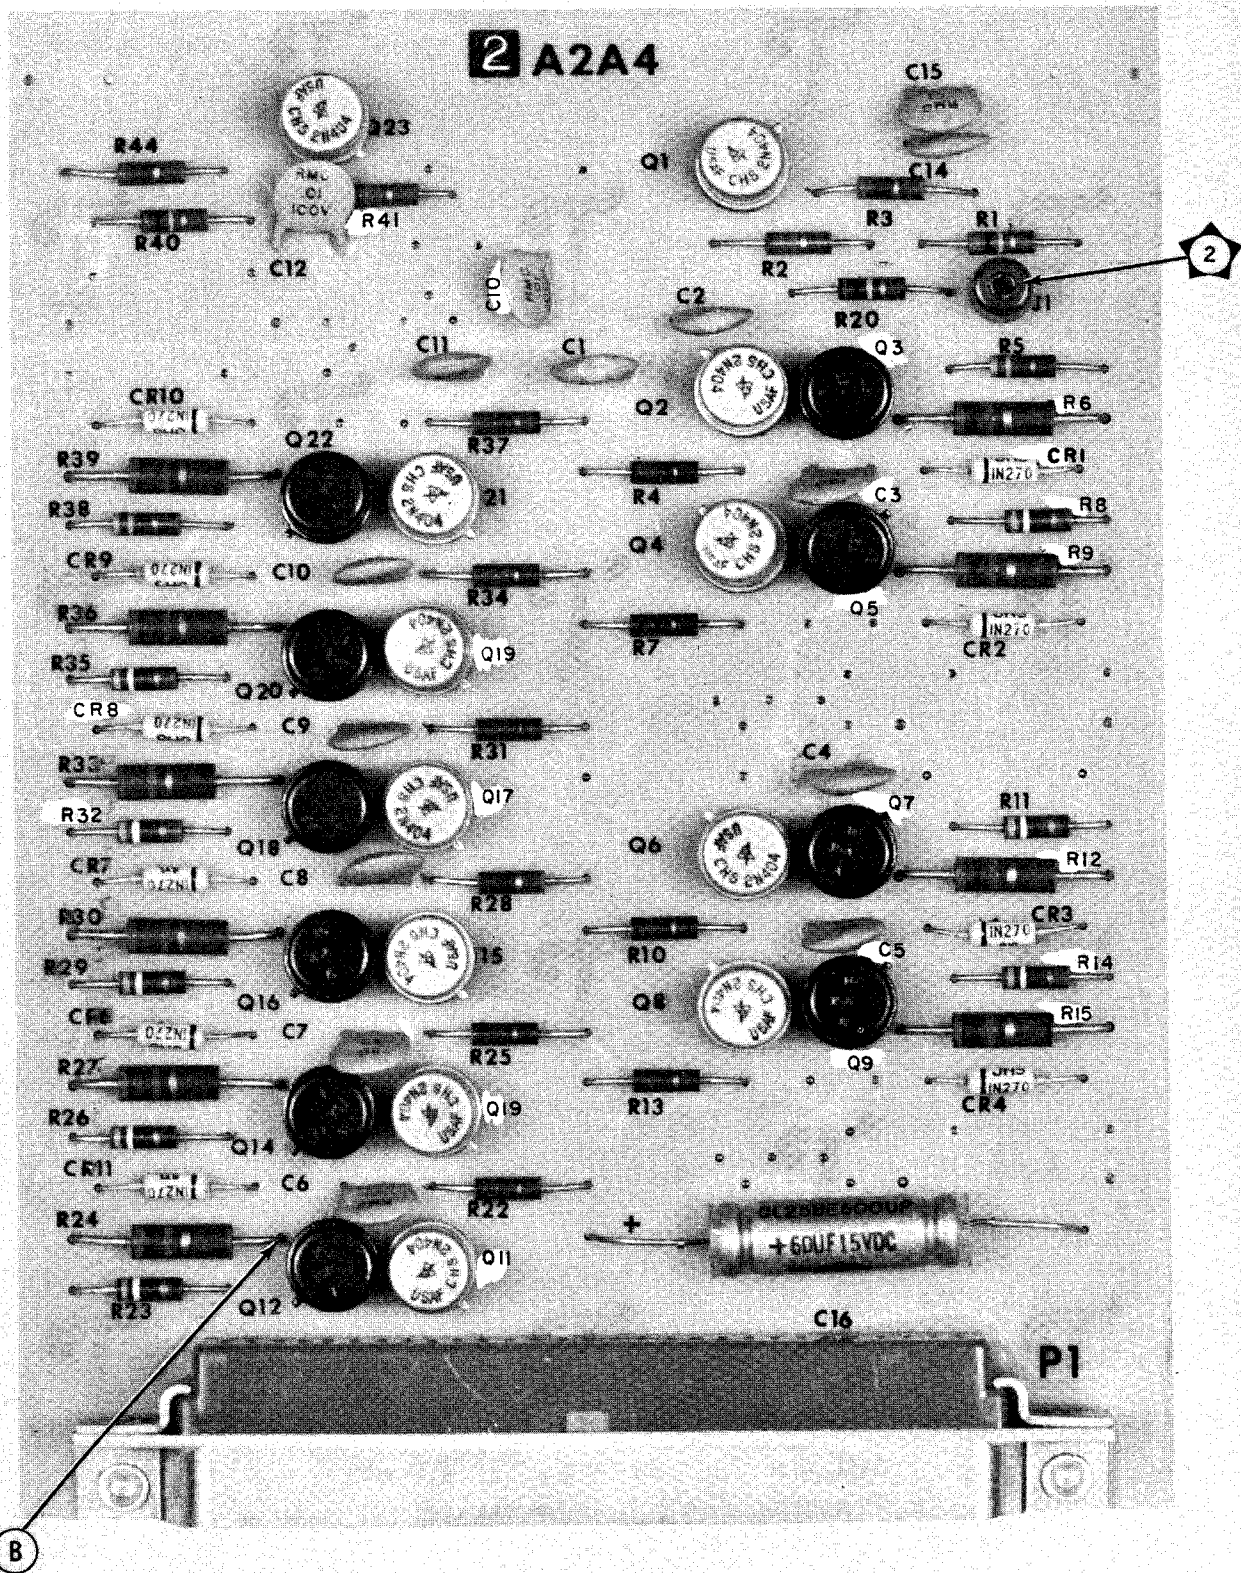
Mux-Demux, Printed Circuit Board A4
